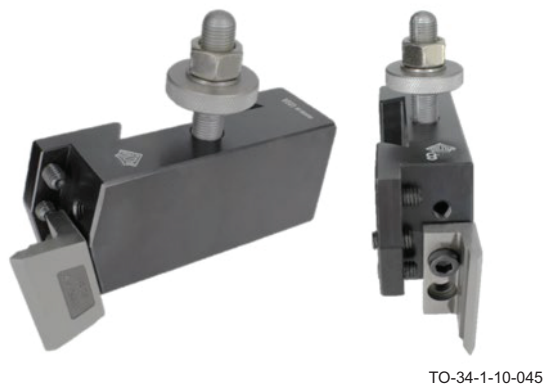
Thread Cutting Tool Holder and Cutter Bit
